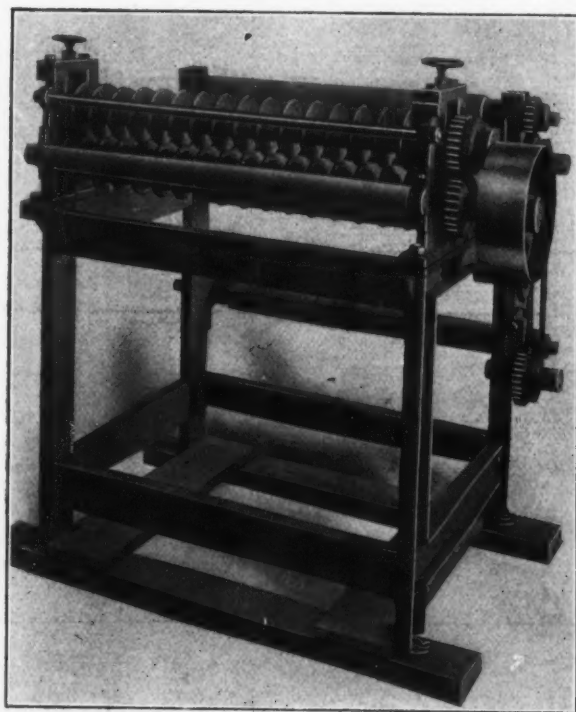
The Slitting Machine for Cutting Rubber Sheets Into Strips.
